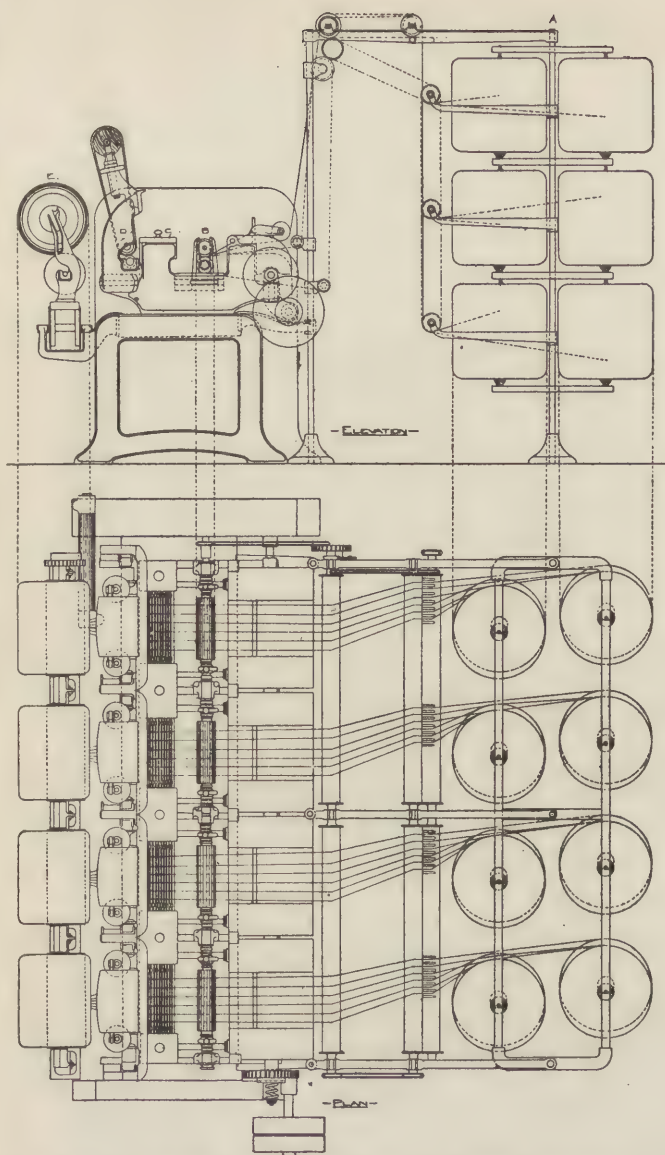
A.—Four-head French Gill-box in Plan and Elevation.
